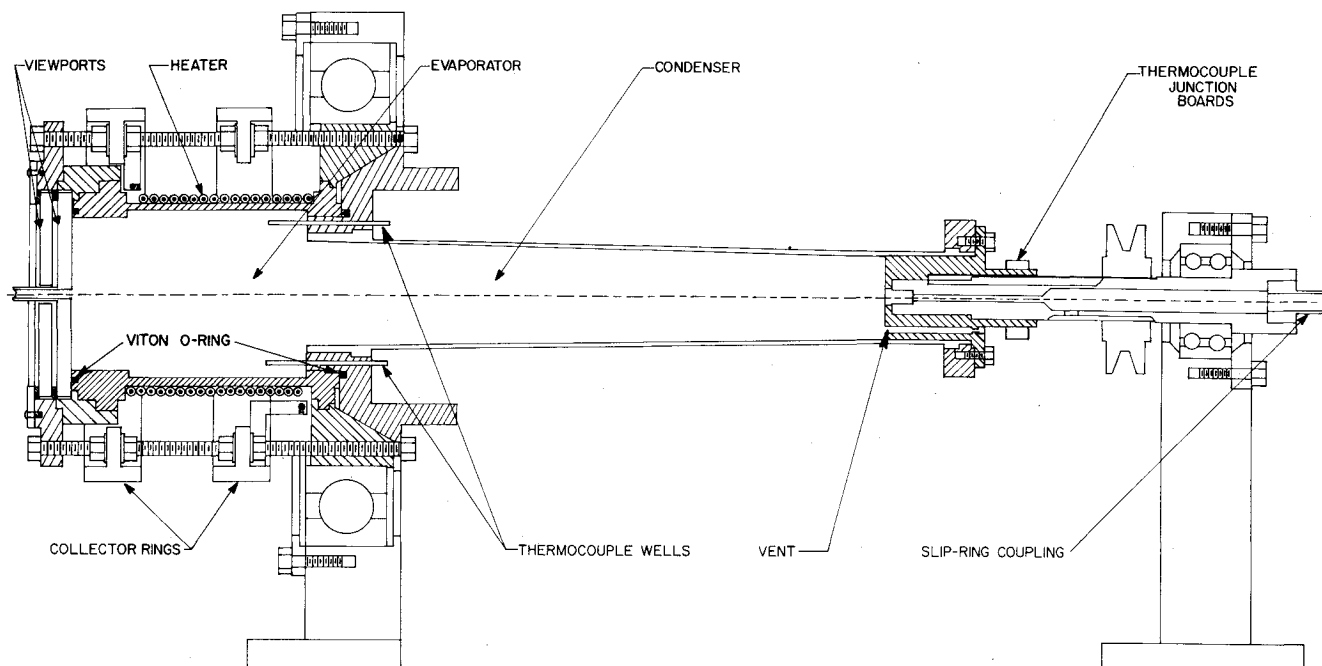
Cross-sectional drawing of the rotating heat pipe.
